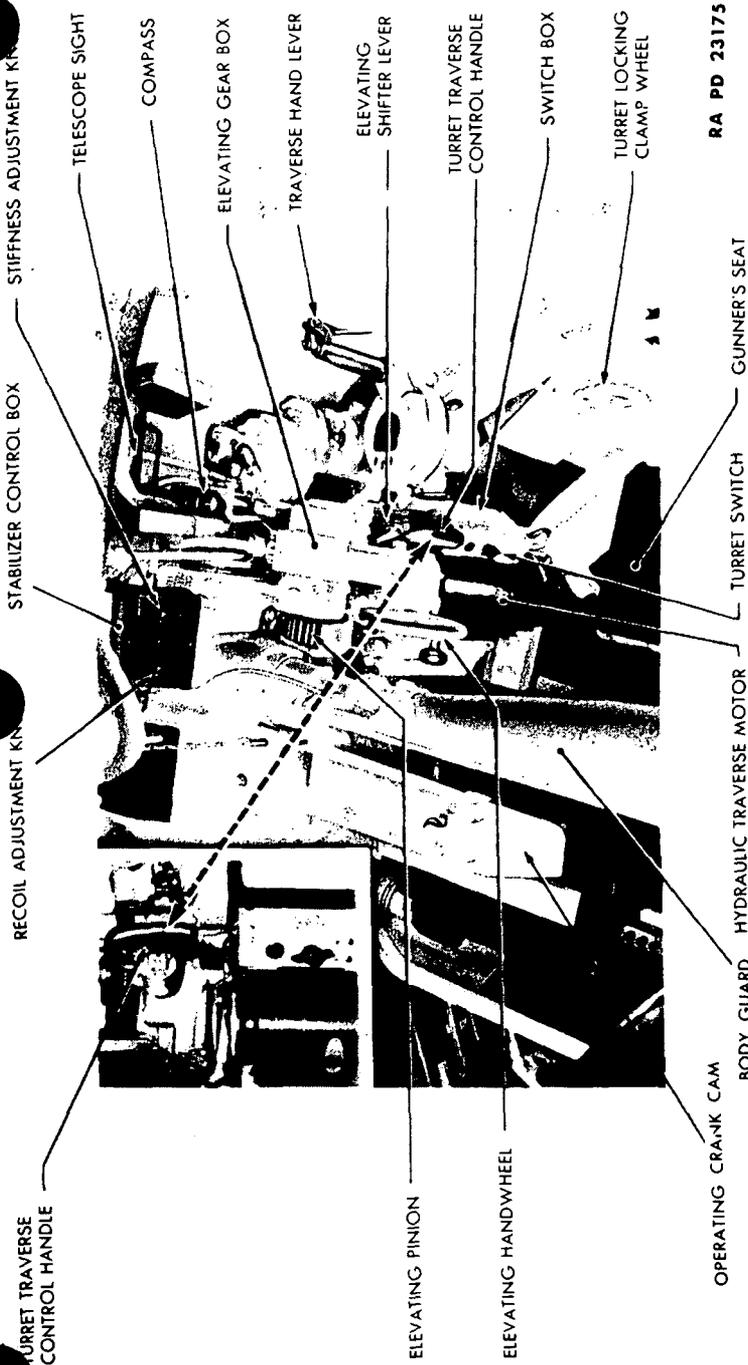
Hydraulic Traversing Mechanism Installed in Tank
